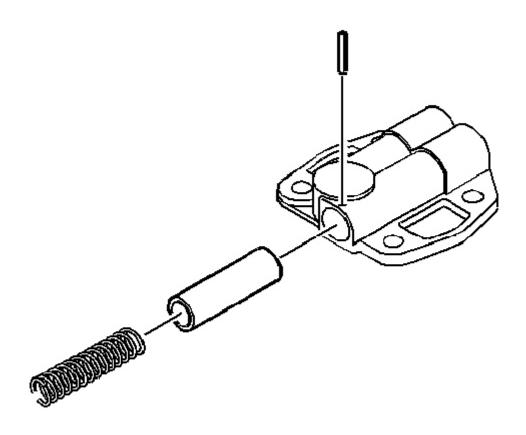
View Of Oil Pump Pressure Relief Valve, Spring & Spring Straight Pin Courtesy of GENERAL MOTORS CORP.
